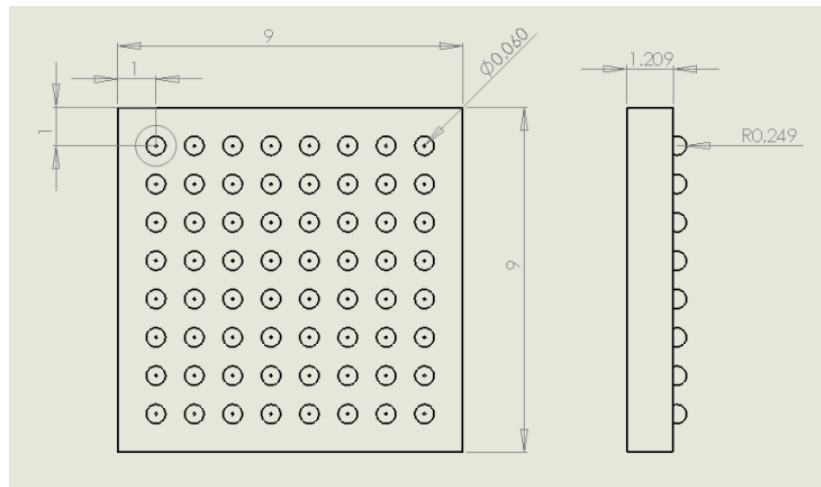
Bottom and side dimensions of 64-lead BGA in mm.
